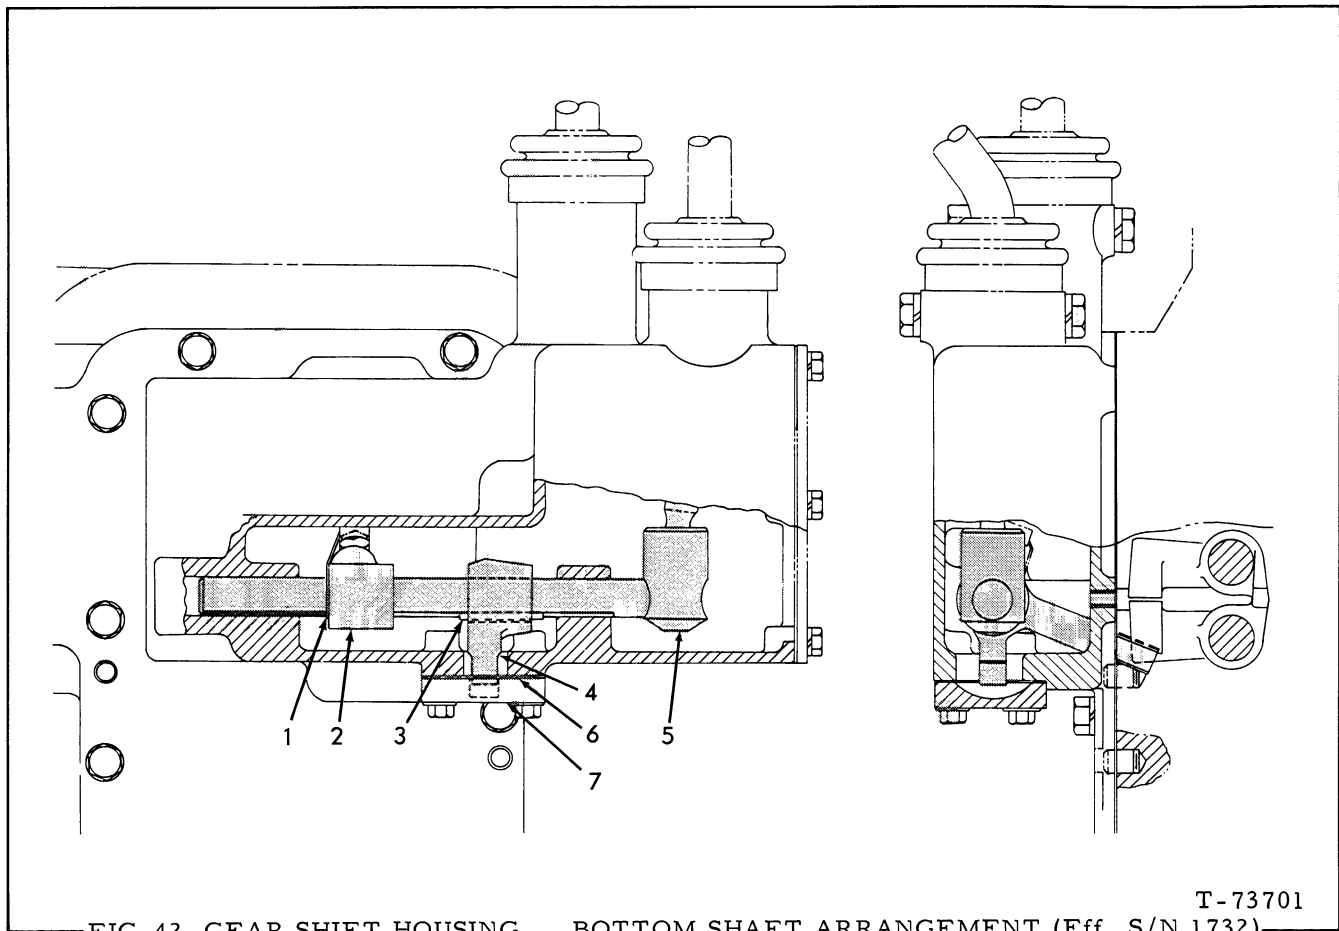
GEAR SHIFT HOUSING BOTTOM SHAFT ARRANGEMENT (Eff. S/N 1732)
